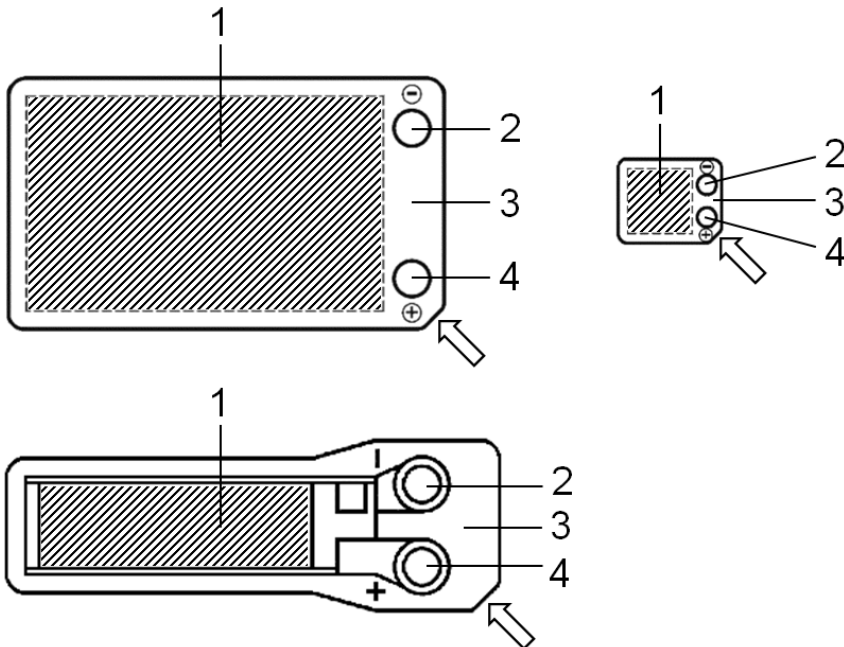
P-876.A1x (top left), P-876.SP1 (top right) and P-878.A1 (bottom)
